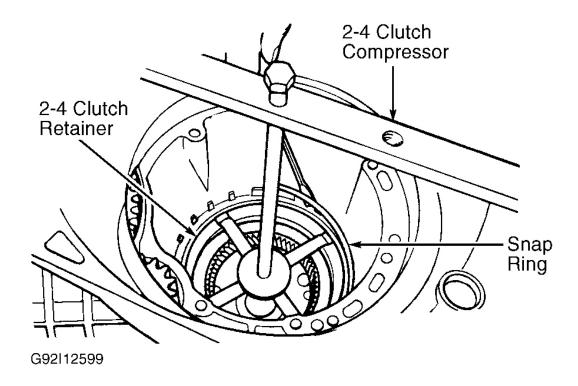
Compressing 2-4 Clutch Retainer Courtesy of CHRYSLER CORP.
